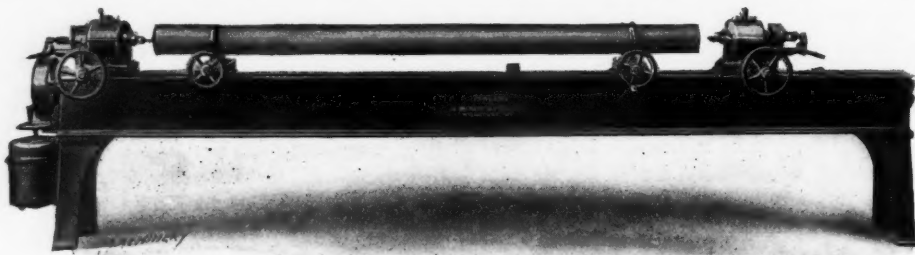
Front View of Pawling & Harnischfeger Centering Machine working on Shaft $7\frac{1}{4}$ Inches in Diameter by 9 Feet, 8 Inches Long
